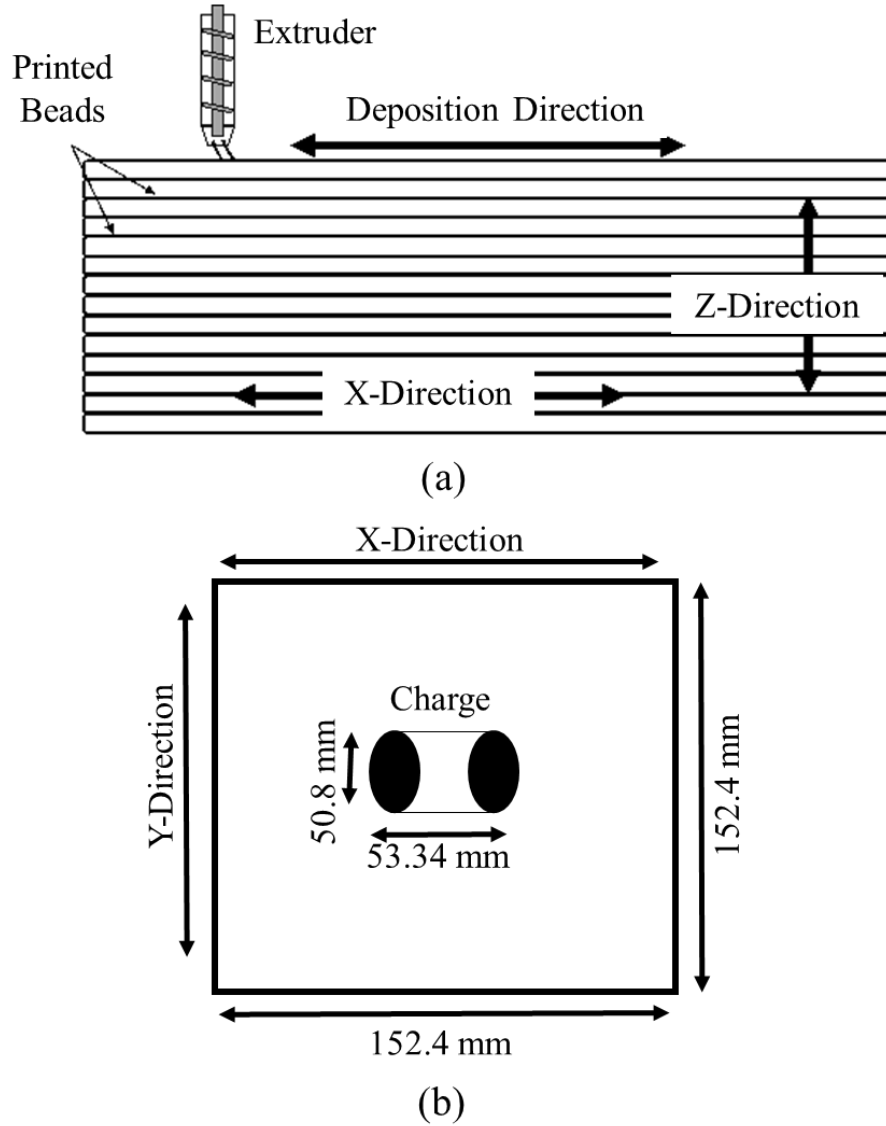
Schematic for testing coupons directions; (a) EDF-AM hexagon edge (304.8×304.8 mm²). Bead: Each successive layer deposited by the extruder, and (b) ECM plaque (152.4×152.4 mm²). Charge: Location of the charge placed in the mold
